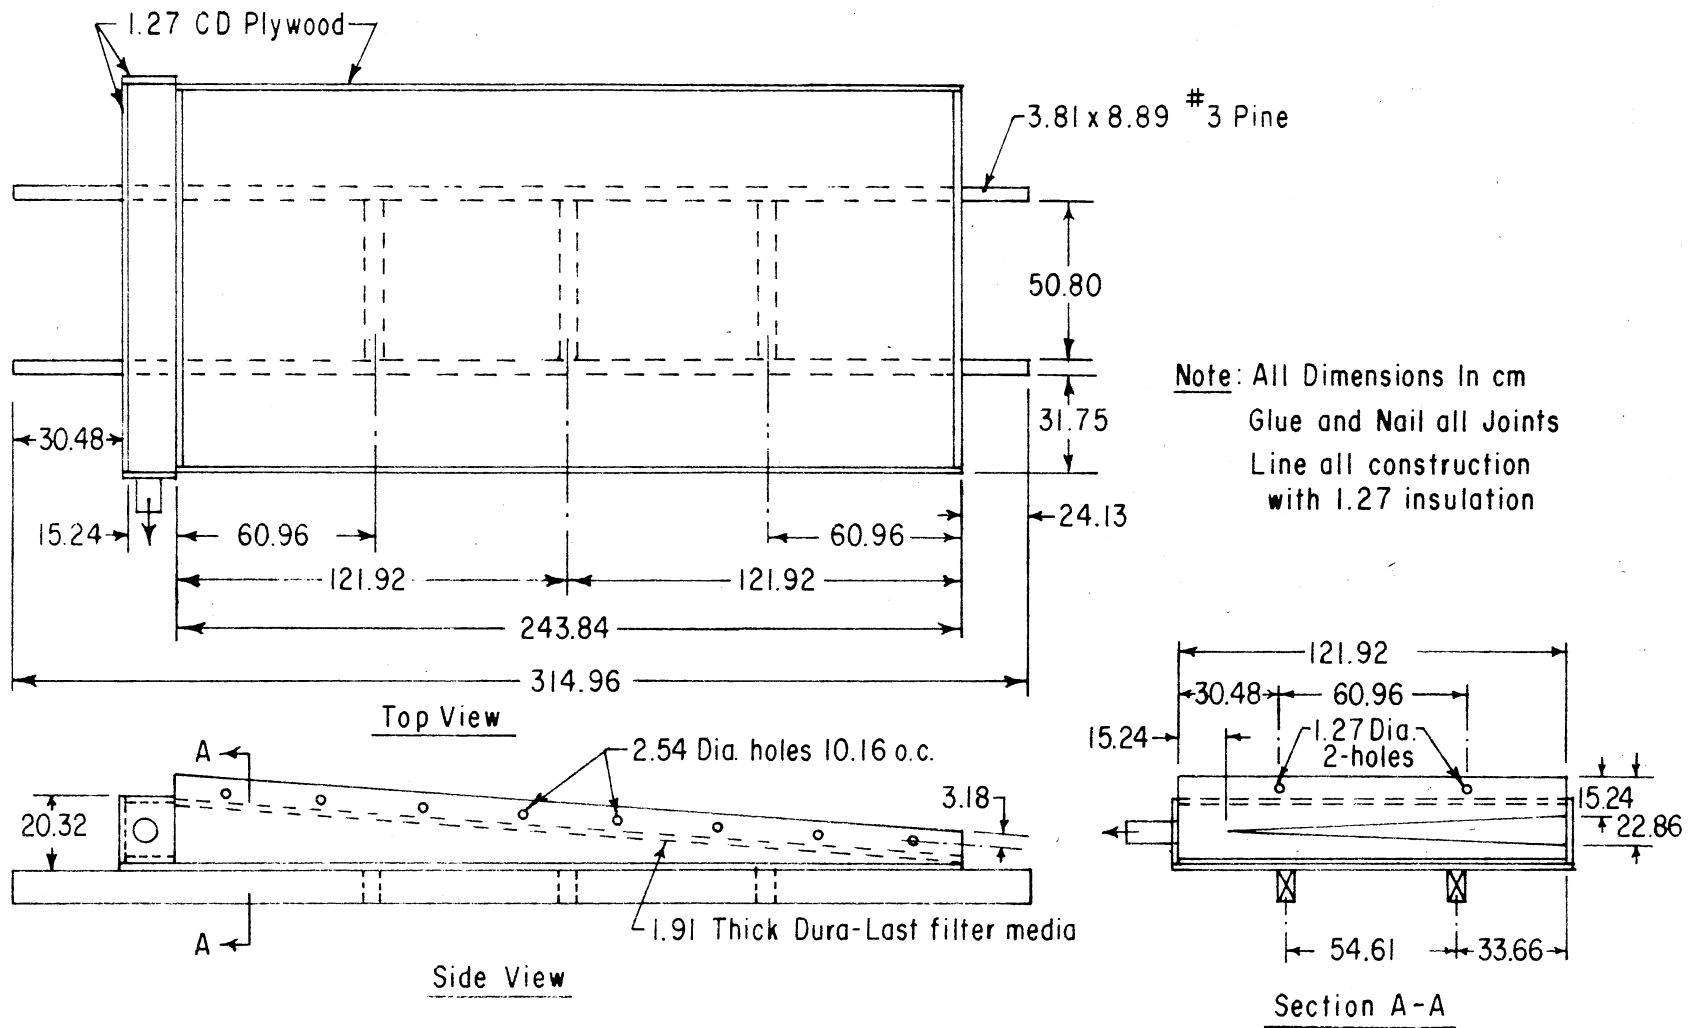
Wedge-Shaped Matrix Solar Collector Working Drawing.
